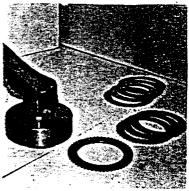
(Applies To Models With Four-Plate Clutches Only) Drop the pressure ring (Part #7166) on the piston and insert the clutch spring (Part \$7169) so that the inner edge presses against the pressure ring and instal the inner snap ring (Part \$7171). Make sure that the snap ring is securel; seated in its groove.
